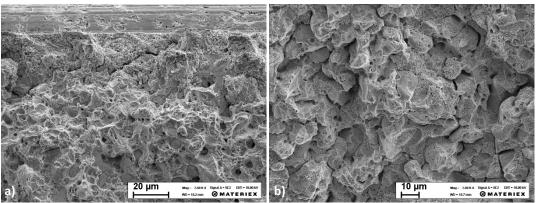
SEM-images of fracture surface showing a) a ductile mode of fracture at crack initiation site, b) Intergranular brittle mode of fracture at the majority of the fracture surface.
